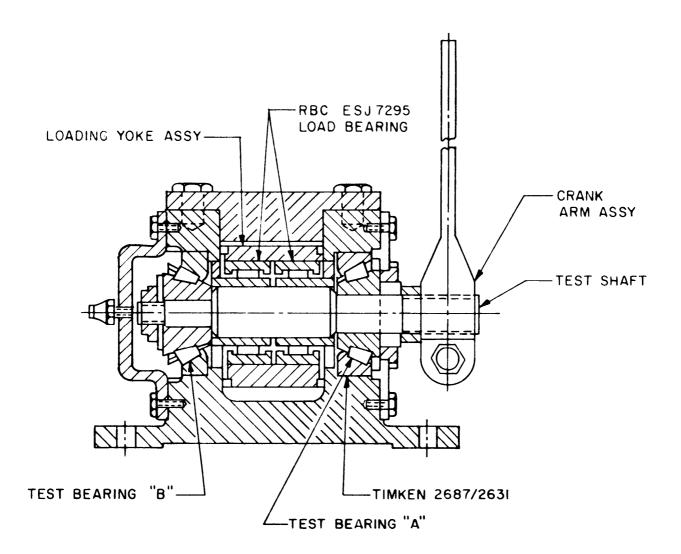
<u>Bearing tester assembly-SKP-1903.</u>
